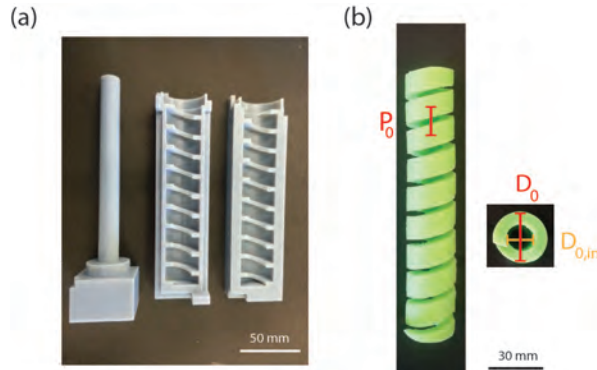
Fabrication. (a) 3-D printed plastic mold, and (b) elastomeric helix manufactured using the mold and casting approach.
